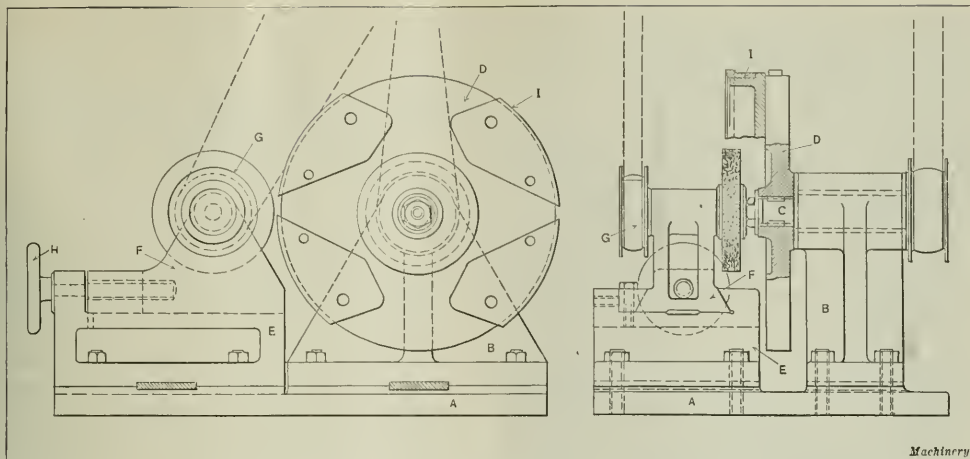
Fixture for grinding Cutting Edges of Upper Die Blades
